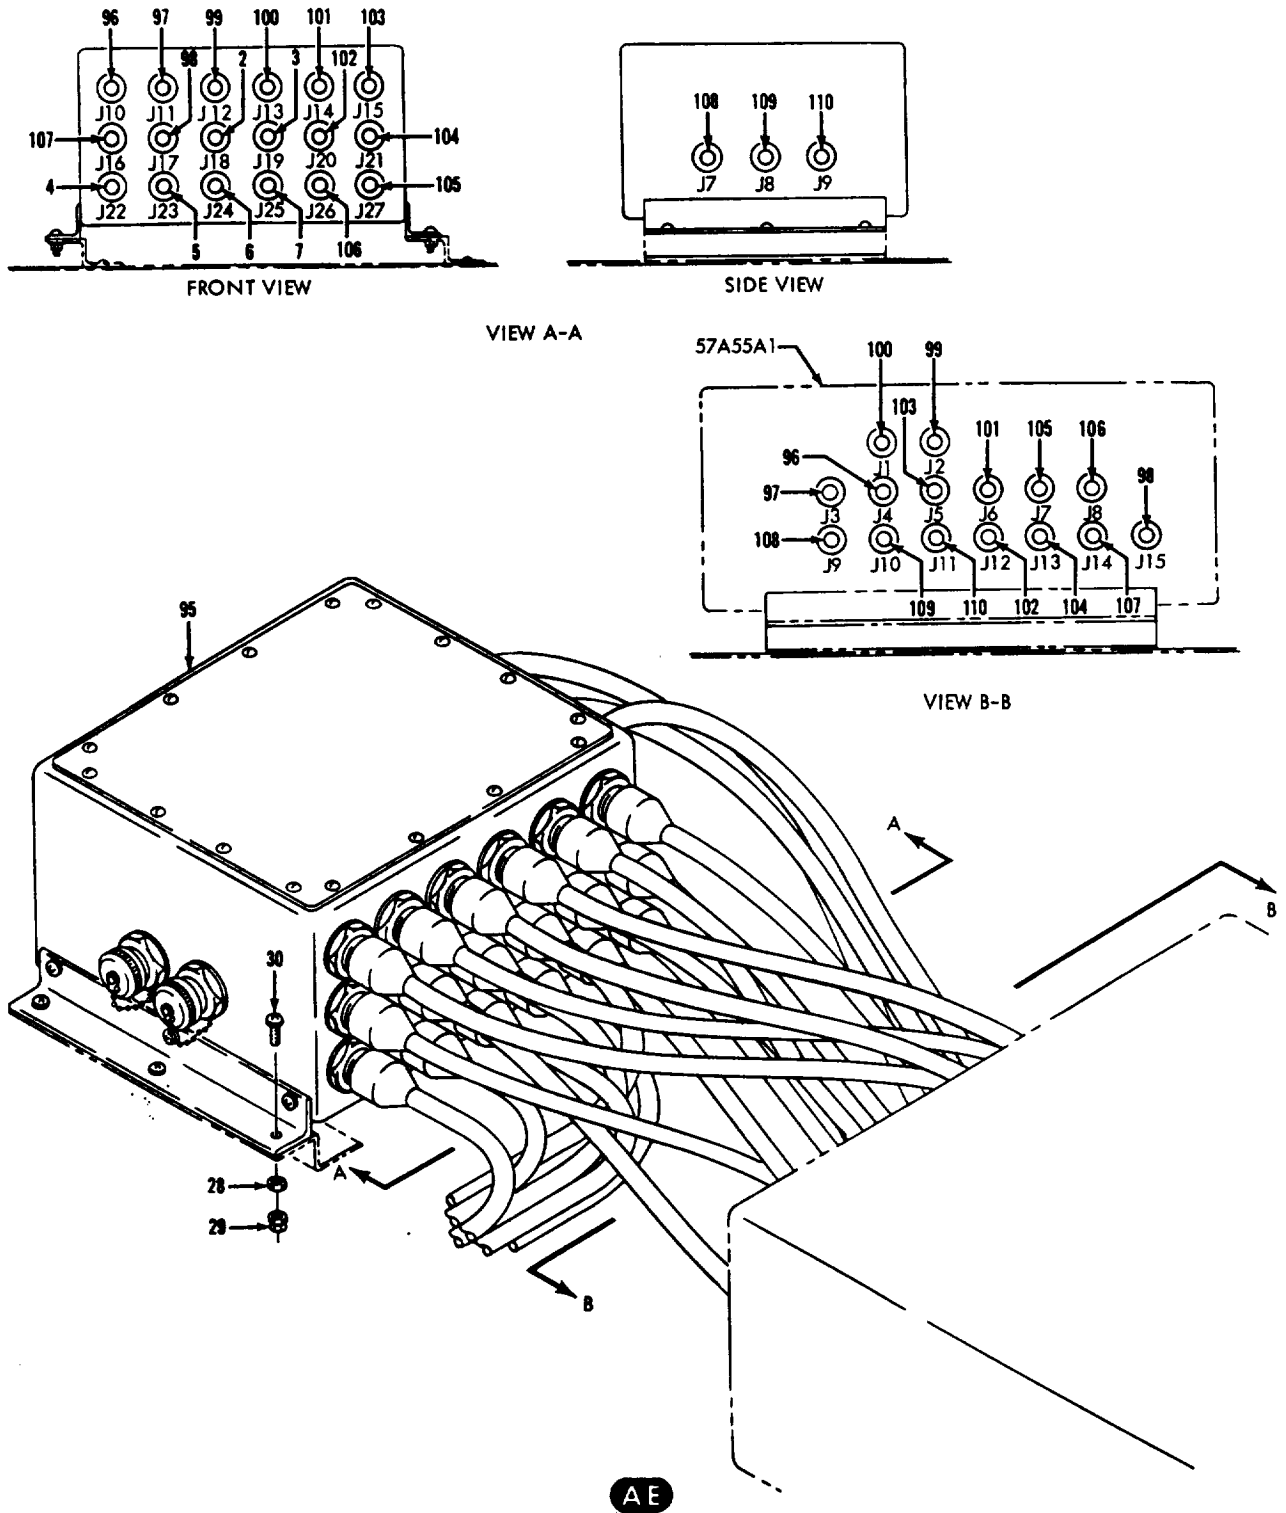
Electrical Equipment Installation (Sheet 10 of 19)
